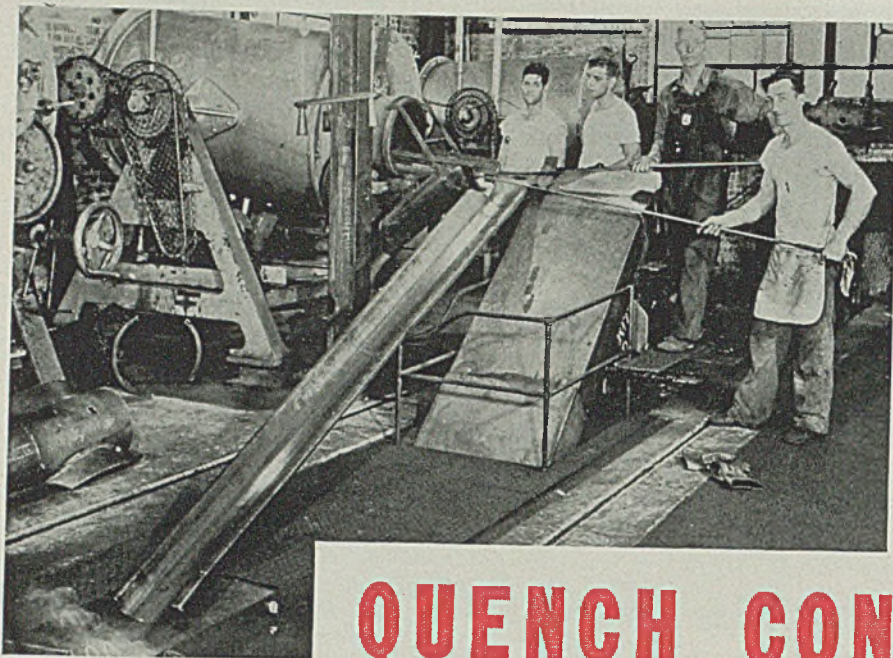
Raking red-hot parts from end furnace to removable chute, then to drop chute to submerged conveyor in quench tank
